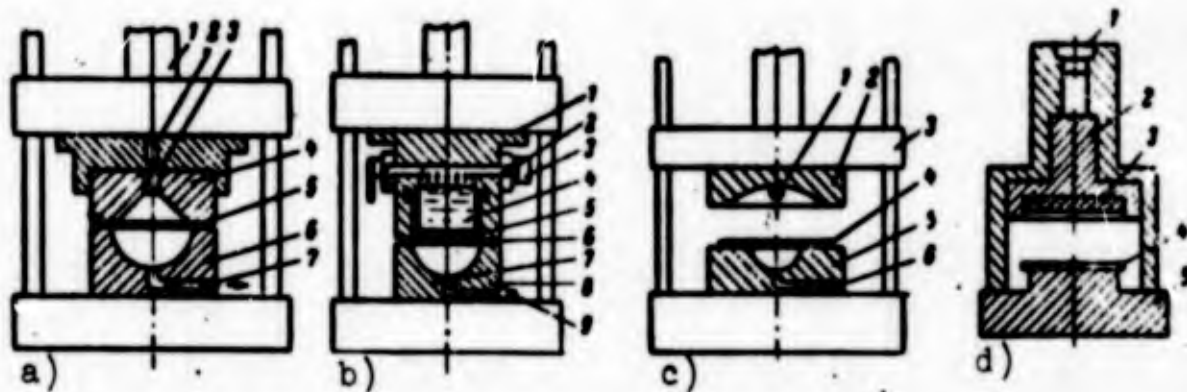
Diagrams of forming of parts using energy of an explosion. a) stamping by pressure of gases; 1) lift rod of crossarm; 2) ignition mechanism; 3) explosive die; 4) locking die; 5) billet; 6) female die; 7) drain hole; b) stamping by blast wave; 1) charge; 2) reflector; 3) crossarm; 4) blank; 5) die; 6) drain hole; c) stamping by explosion with pressure propagation through liquid; 1) plate, locking the cavity; 2) charge; 3) ignition mechanism; 4) liquid; 5) rubber diaphragm; 6) blank; 7) porous metal; 8) die; 9) vacuum tube; d) stamping by explosion with pressure propagation through rubber; 1) charge; 2) piston; 3) rubber pad; 4) blank; 5) die.
